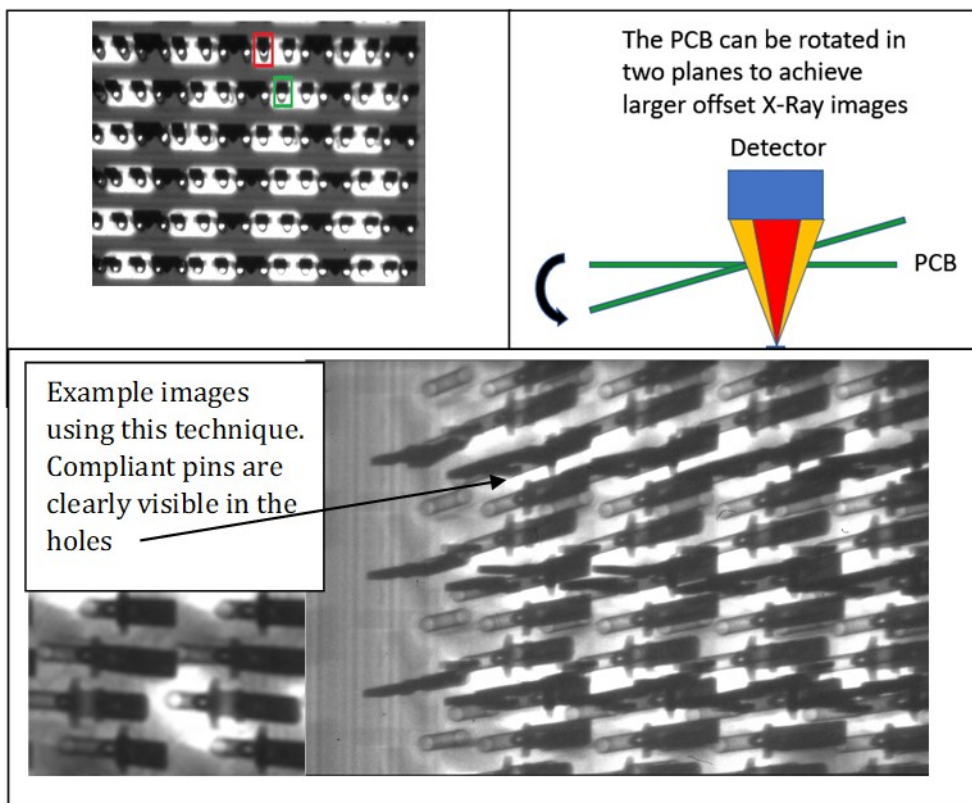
Technique 2 will use larger angled images by angling the PCB under program control.
